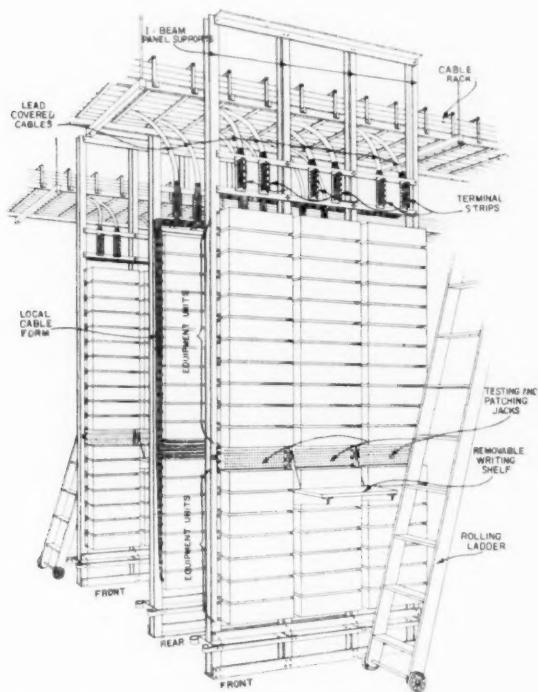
General View Showing Typical Group of Equipment Units Employing Panel Mounting Method
